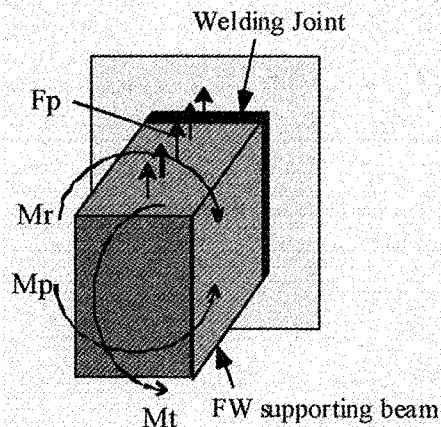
Welding shapes of FW supporting beam
